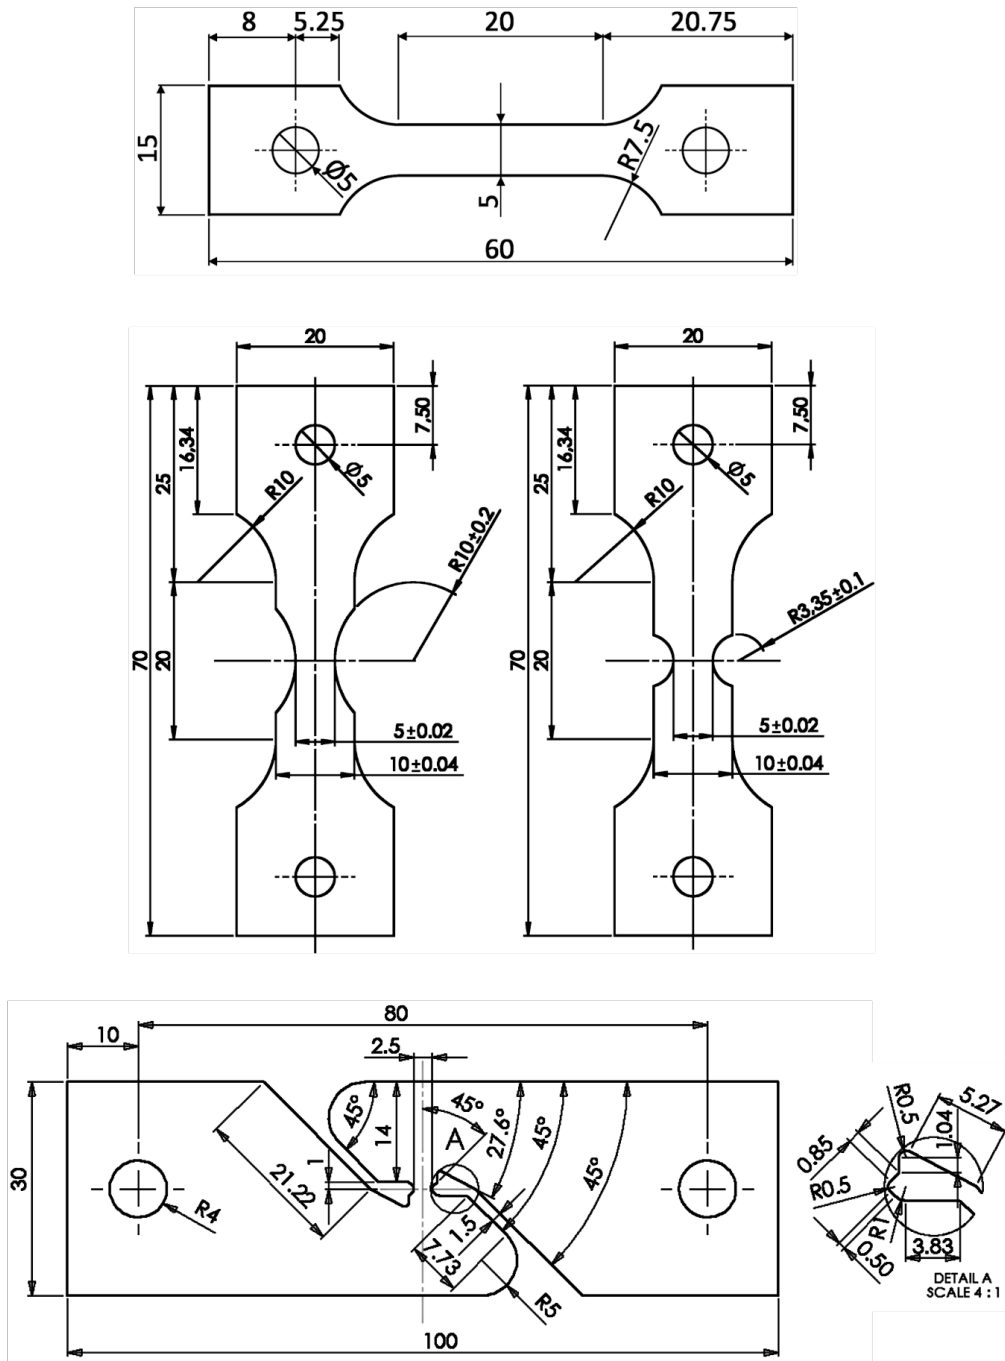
Machine drawings of specimens, from top to bottom and left to right, UT60, NT10, NT335, ISS-Venkat. All lengths in millimetres. Thickness of all specimens is 2 mm.
